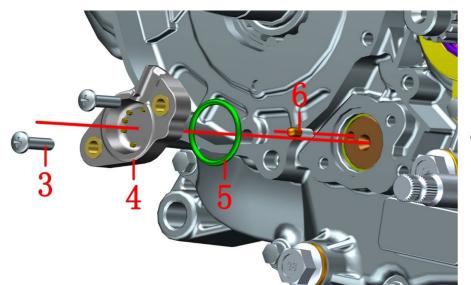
LE	FT CRANKCASE	Remove the gear switch	CHK
